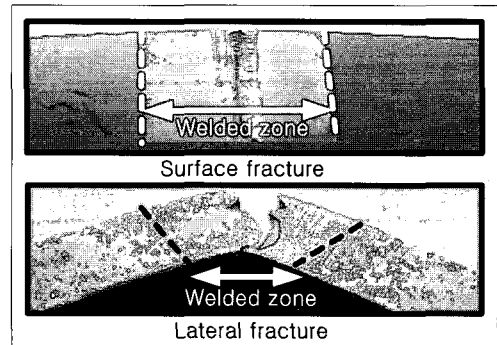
Fracture surface and lateral face of the defect guided bending test specimen by FSW
